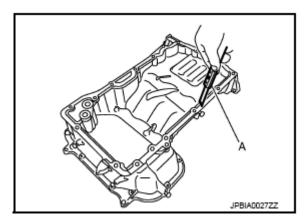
Removing Liquid Gasket From Mating Surfaces Using Scraper Courtesy of NISSAN NORTH AMERICA, INC.
